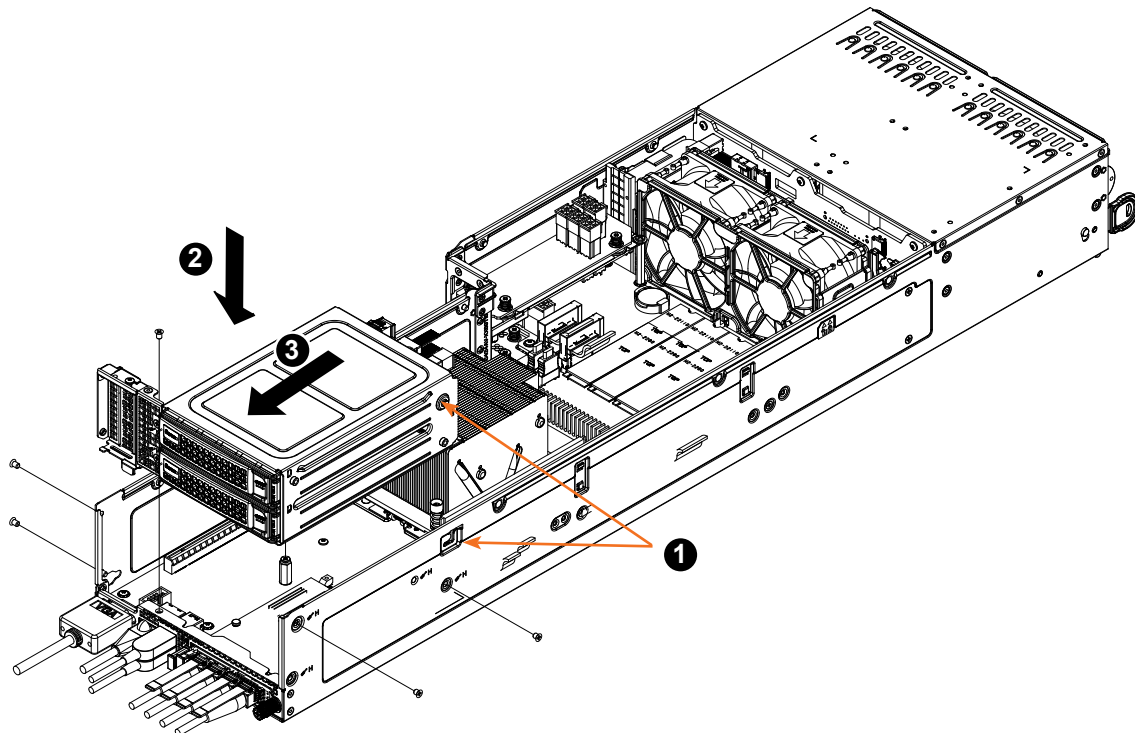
Installing Rear 3.5" Hard Drive Cage
